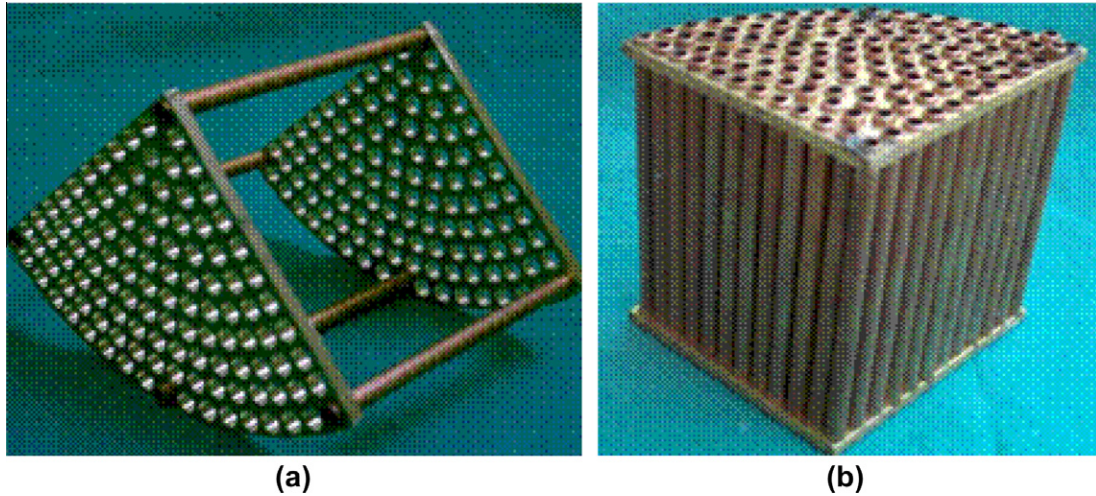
(a) Elbow-bend heat exchanger during its assembly adjustment. (b) Elbow-bend heat exchanger after its assembly.
